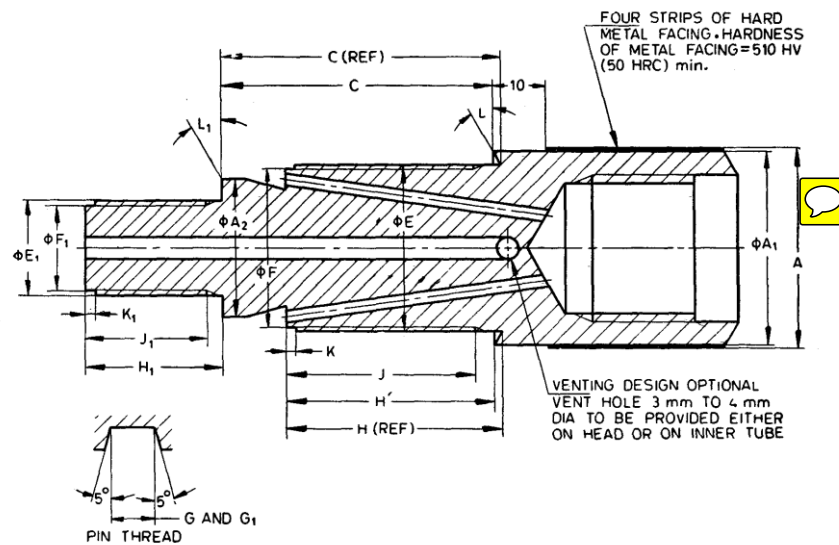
'WT' DESIGN DOUBLE TUBE CORE BARREL — INNER TUBE
